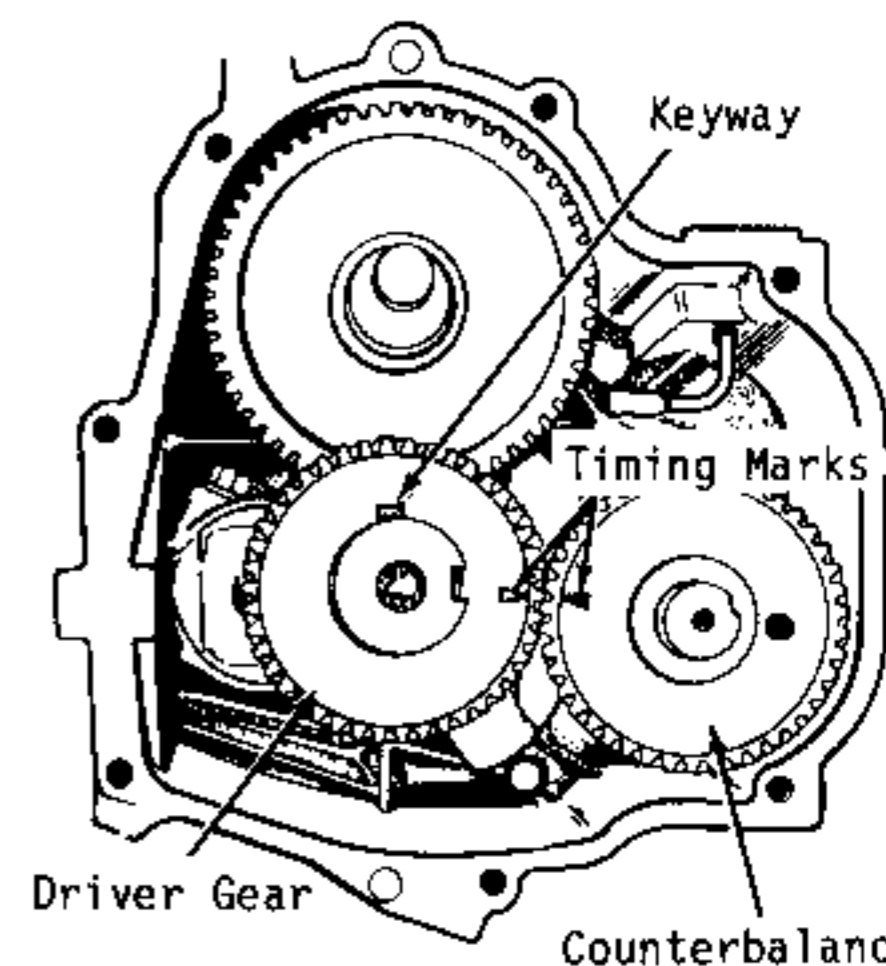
Counterbalance gear and drive gear timing marks must be aligned after installation.
